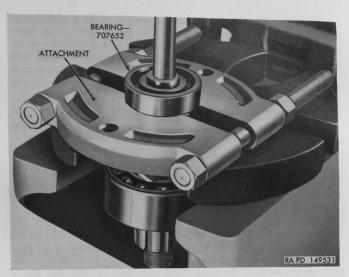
Removal of drive pinion inner bearing with attachment 41–A–345–328 (part of puller set 41–P–2905–60).
